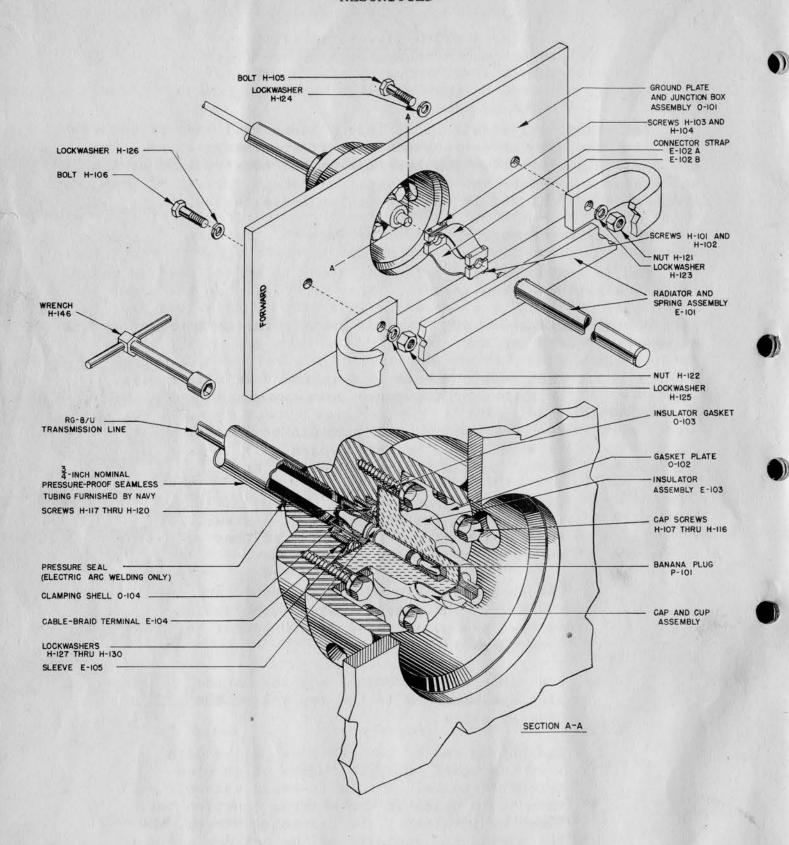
Exploded and Sectional Views of Type CAGQ-66134 Antenna Assembly
